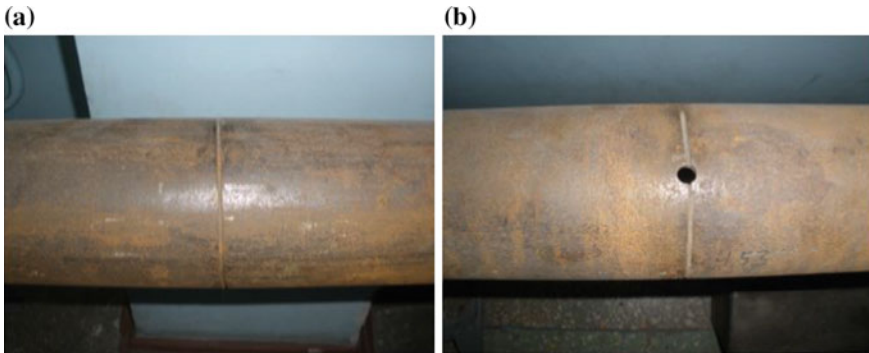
Two types of defects on the sample pipe: notch (a) and notch with hole (b)
